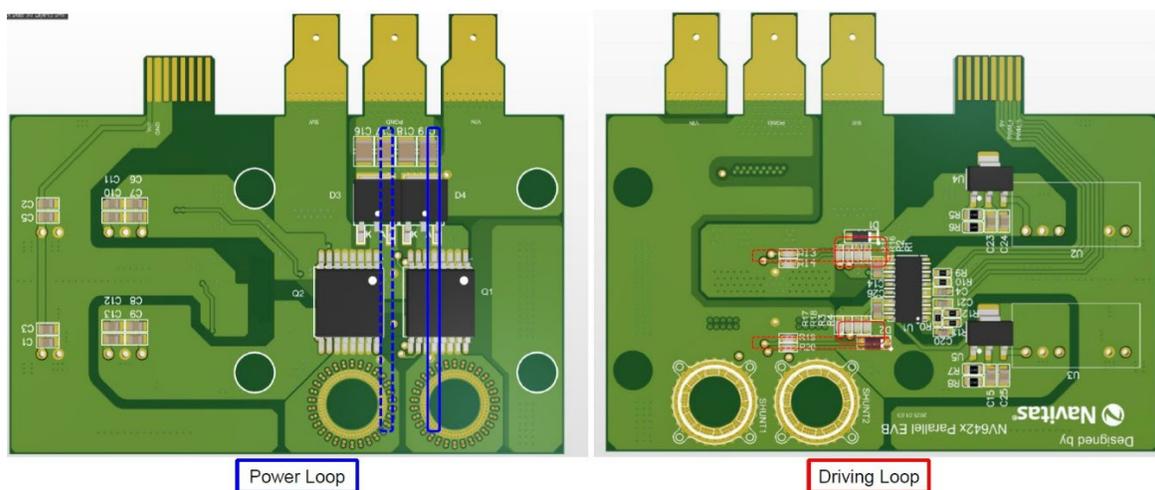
Example PCB layout for parallel operation highlighting the power and driving loops
